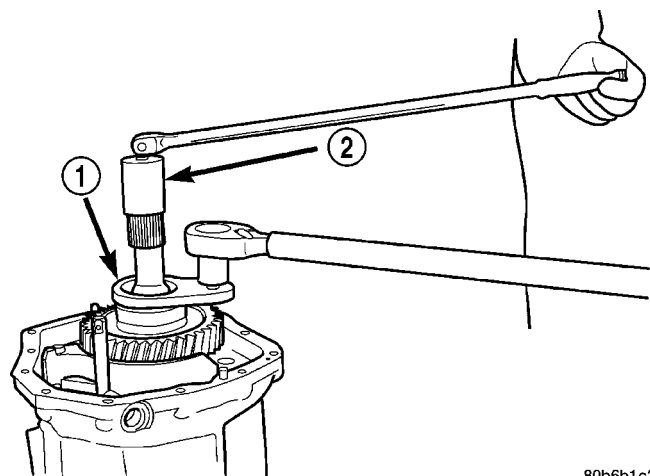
COUNTERSHAFT REAR BEARING PULLER
